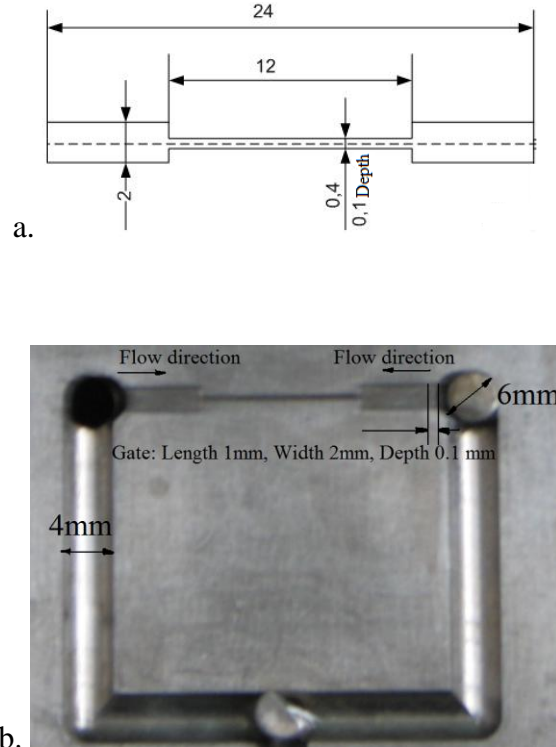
a. Specimen geometry and dimensions(mm);b. the cavity location and runner system arrangement in the real case
